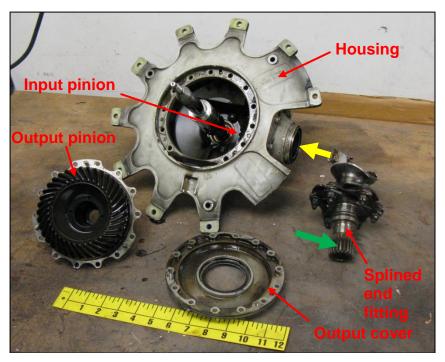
The tail gearbox removed from the stator ring and partially disassembled.
